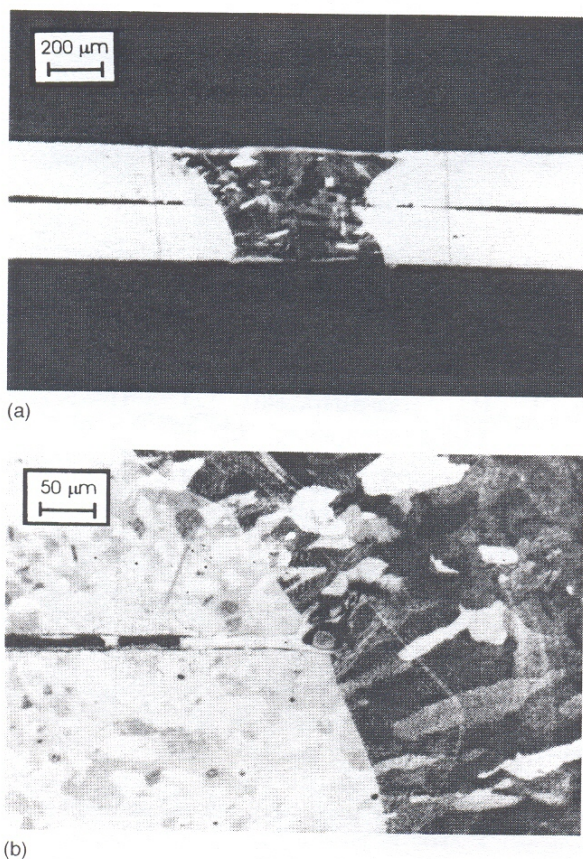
Transverse section of a weld in Au/Ni-plated nickel sheets: (a) full weld and (b) brazing at the interface by the plating layers in the HAZ region at the interface.
